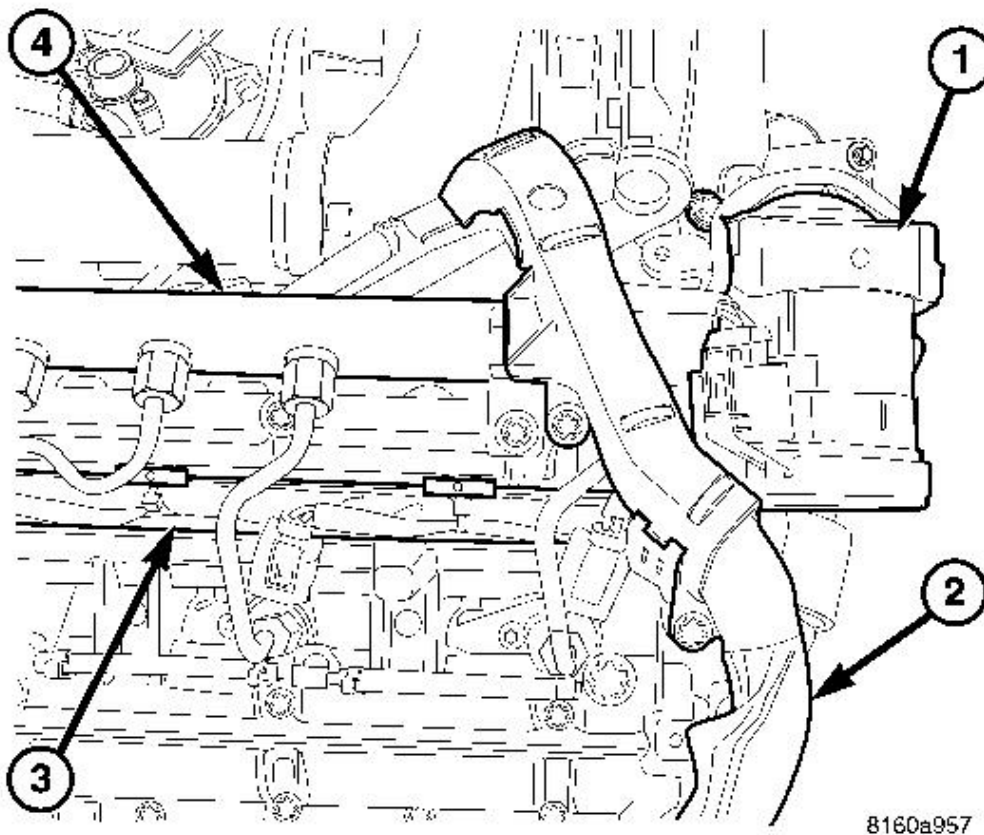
Exhaust Gas Recirculation (EGR) Valve, Main Engine Wiring Harness, Fuel Injector Wiring Harness & Left Fuel Rail
